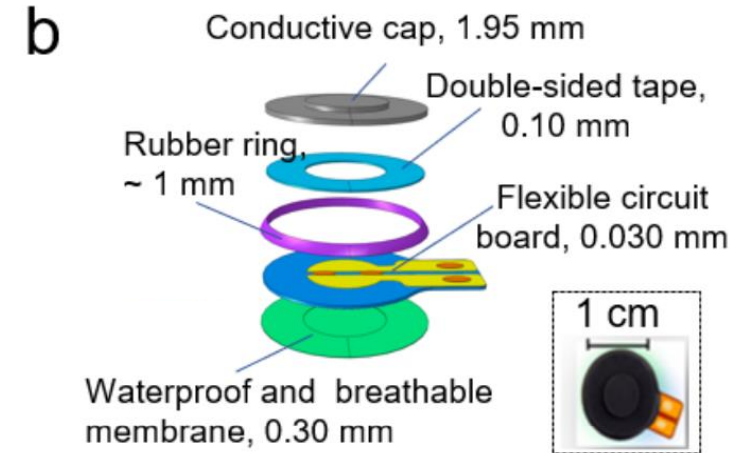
b. Explored view schematic of a planter pressure sensing unit.
